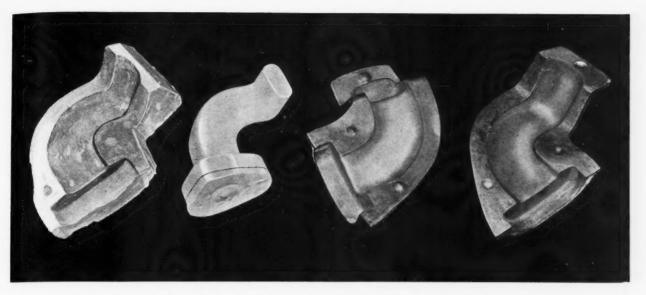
Plaster breakaways and metal-sprayed molds used in producing them
